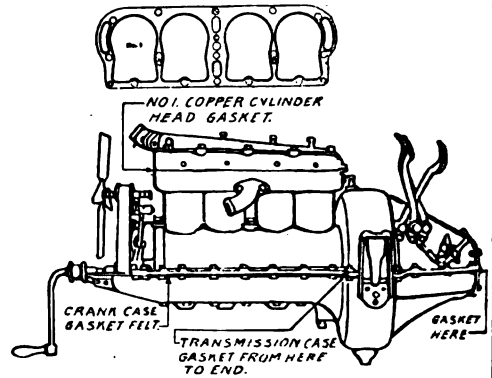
Left side of Ford engine showing location and kinds of gaskets used.
